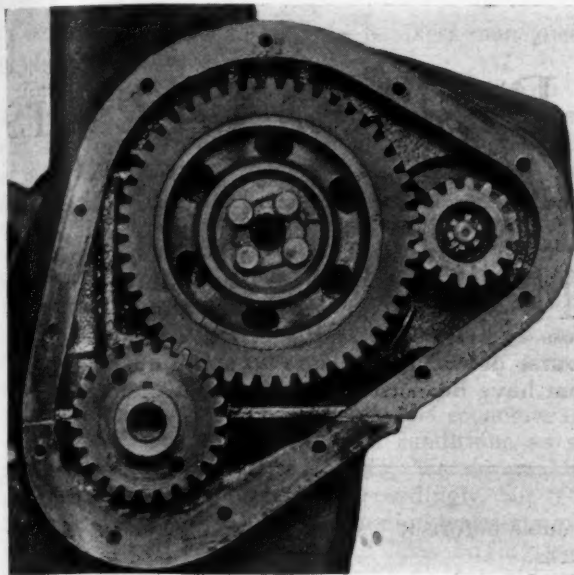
Typical arrangement of molded-on-the-hub type cam gear in a three-gear timing train
